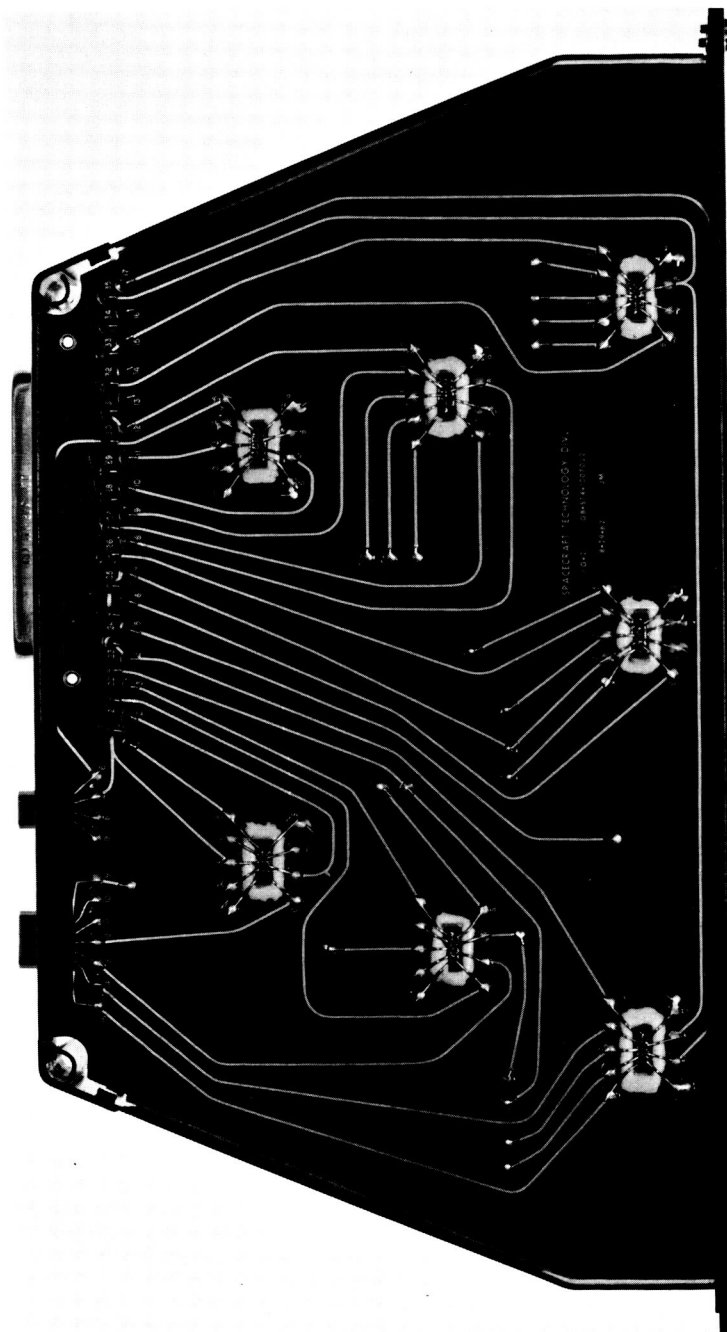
IG2, Card 2, Magnetometer Gating Circuits (Bottom)
